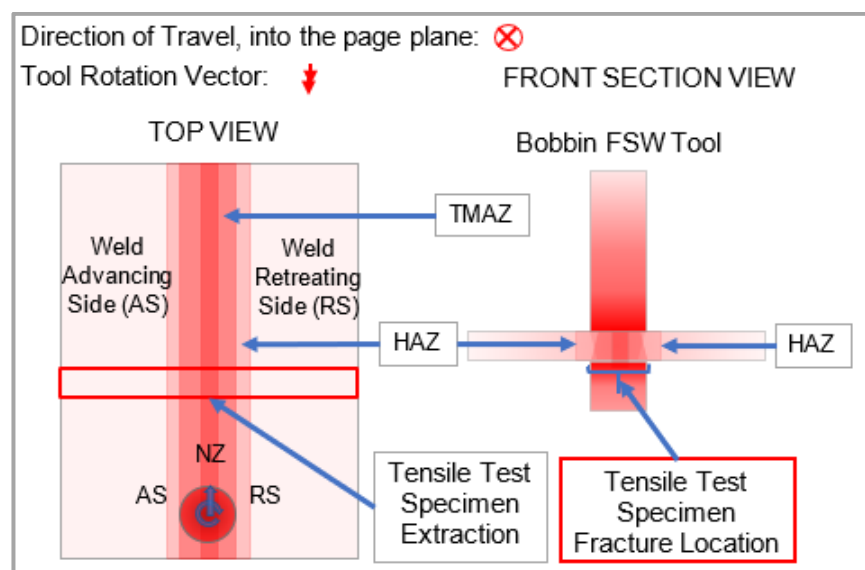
Tool 1 & Tool 2 Tensile test specimen fracture location
